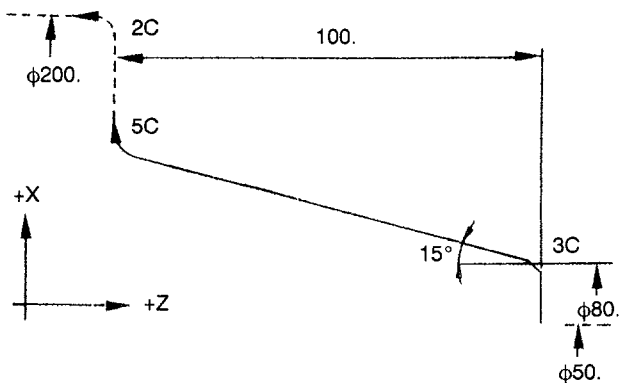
Multiple Chamfering on Both Ends of Taper
